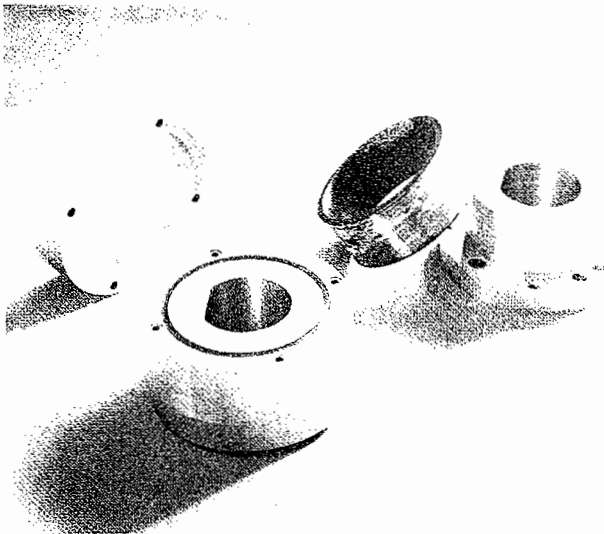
Canned Motor Pump with Magnetic Bearings Installed.
